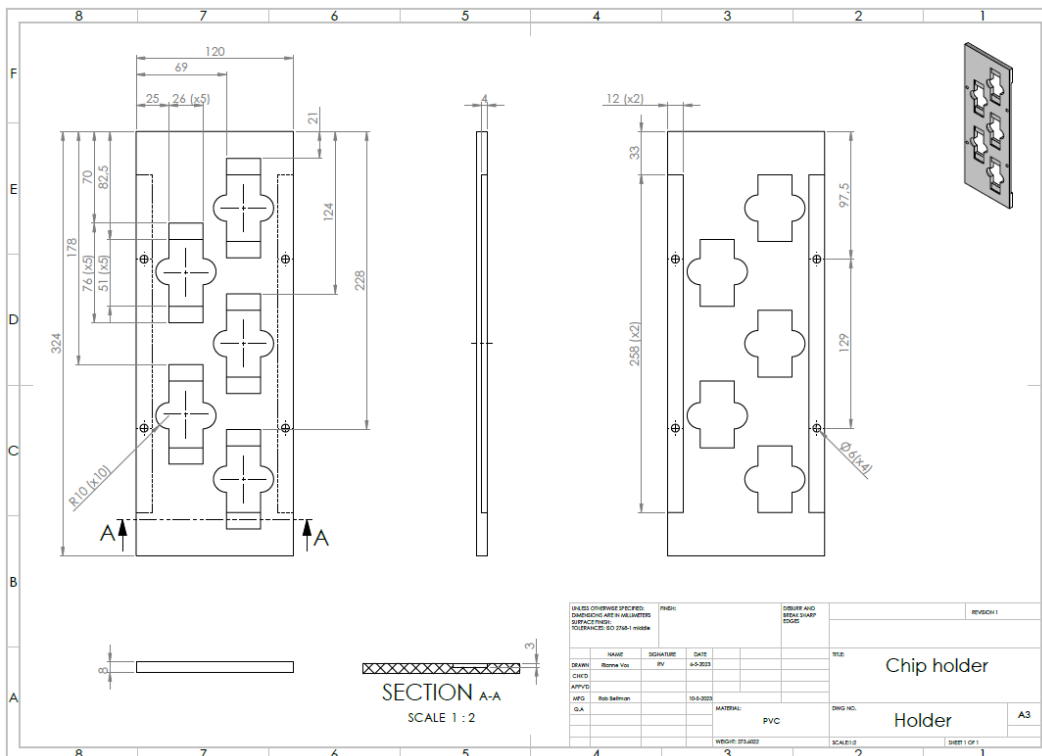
Drawing of chip-holder created in SolidWorks with dimensions in millimeters (mm). The drawing serves as reference for the sawing and milling production.
